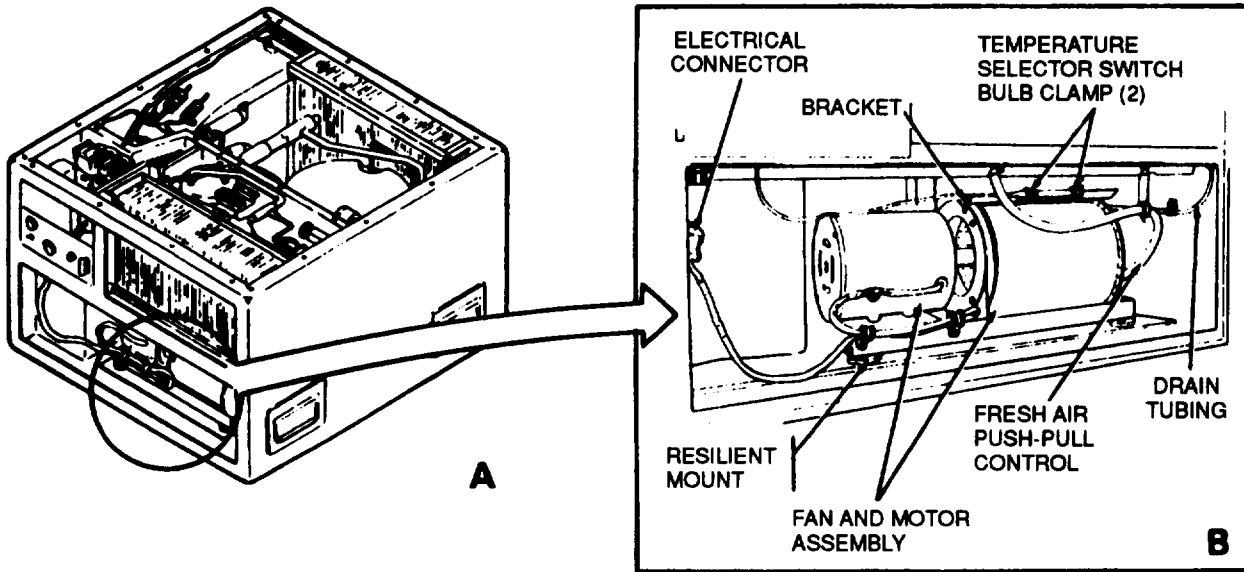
Evaporator Blower and Motor (Sheet 1 of 3)
